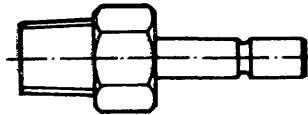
METRIC PUSH-IN TUBE FITTINGS
